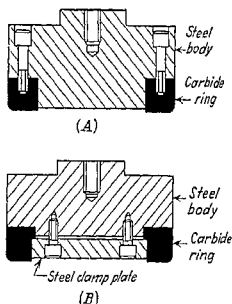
Method of attaching carbide wear rings to large punches.
